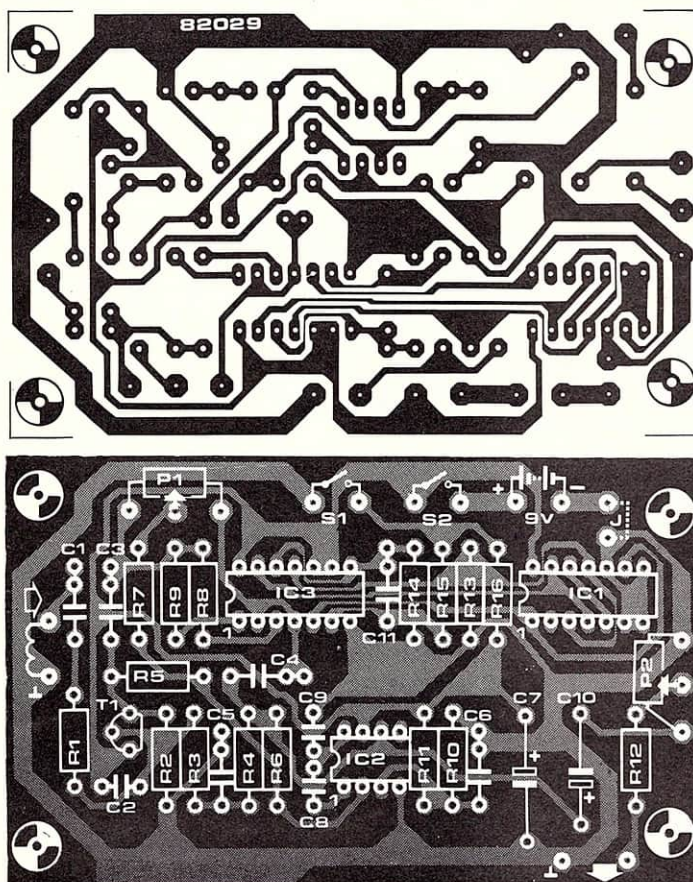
The component overlay and the copper tracking pattern for the high boost printed circuit board.
